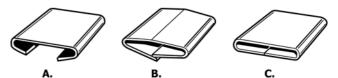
A. Thread-On (Closed) Seal, B. and C. Push Type (Overlap) Seals
